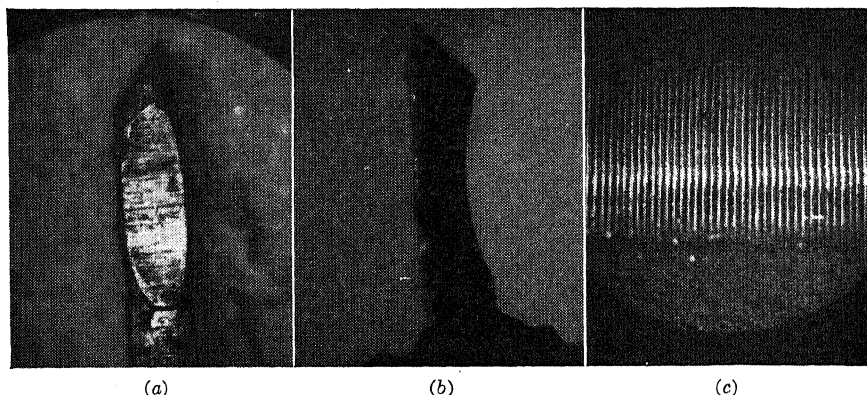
Wear of No. 19 Alloy contact and Lohm wire. (a) Contact surface after 875,000 cycles; (b) contact profile worn 0.006 in. deep; (c) winding, very little wear. Contact material excellent for Lohm wire.
